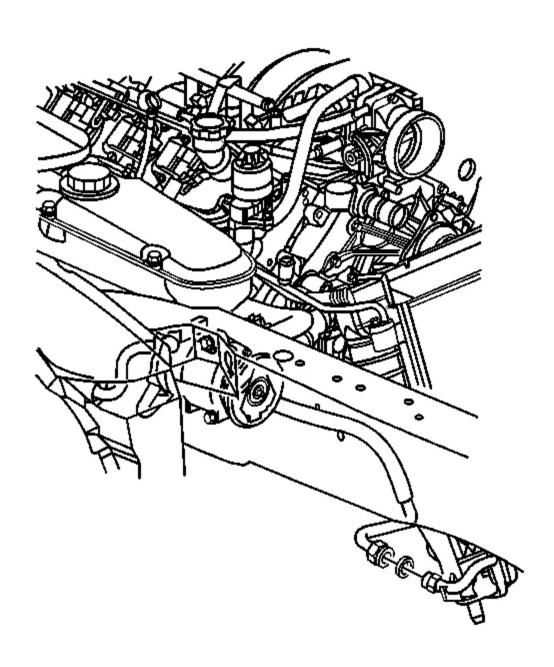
Compressor Hose & Condenser Courtesy of GENERAL MOTORS CORP.
